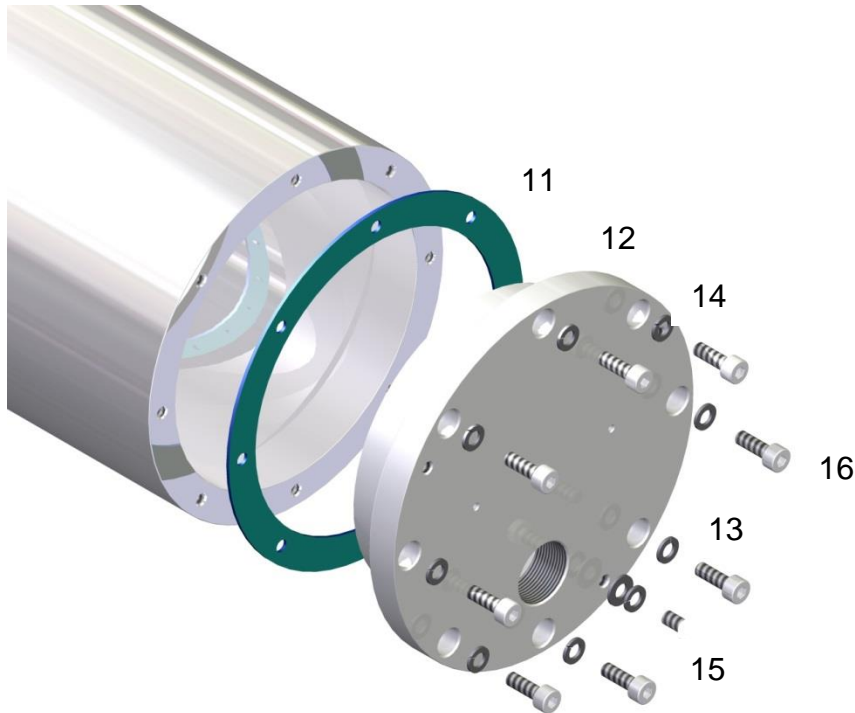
1: Explosion drawing of the enclosure-combination (rear view)
